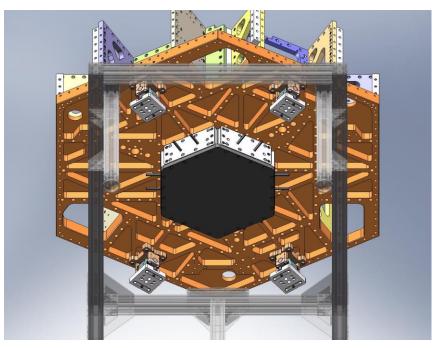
Locker Assemblies bolted to bottom of Stage 1 Floor. Knob ends of Locker Sleeves must face outward.
